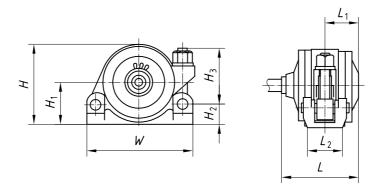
Overall and mounting dimensions of electric external vibrator
